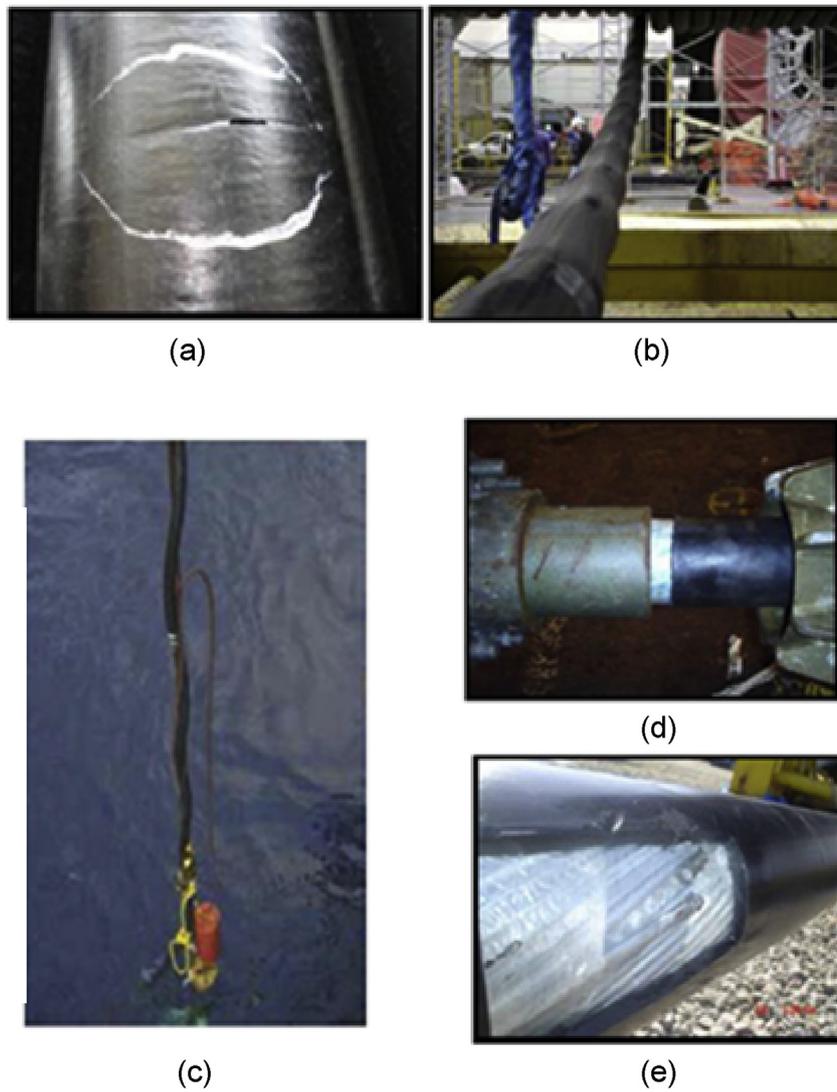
Umbilical failures: (a) cracks in the outer jacket; (b) ripples; (c) kinks; (d) offset of the external sheath in HDPE, and (e) tensile armour wire break (Rabelo, 2013).
